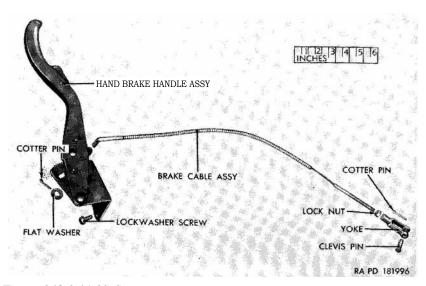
(Added) Hand Brake Assembly M170—Partially Exploded View.
